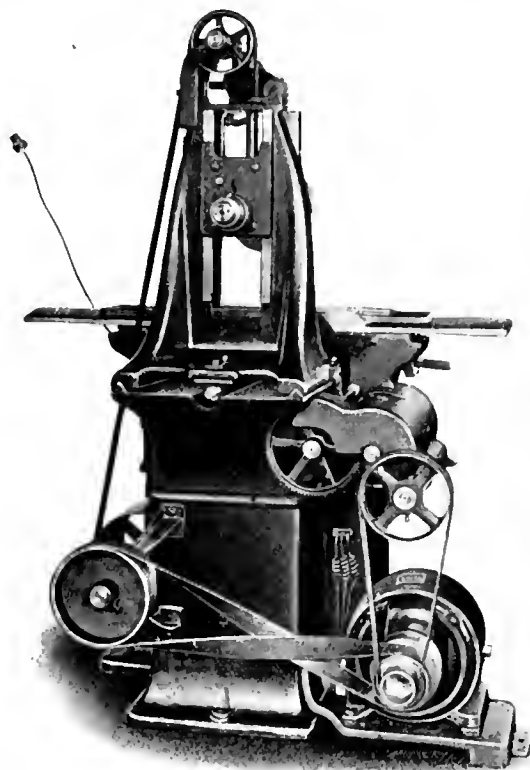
Rear View of Grinder showing Wheel and Feed Driving Connections.
